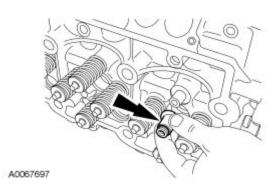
Removing Valve Stem Seal Courtesy of FORD MOTOR CO.
